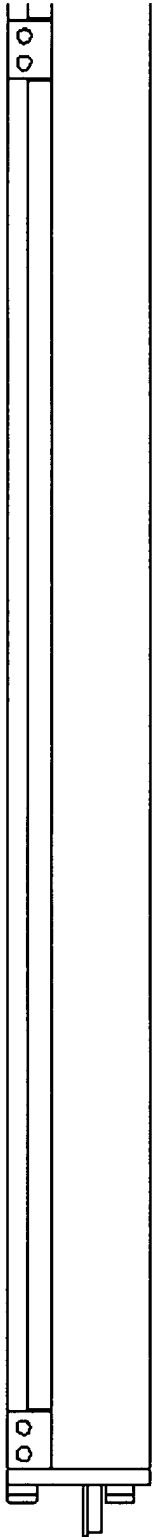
A: Front view of the right end of a floor frame (40 foot collapsible cargo container)
